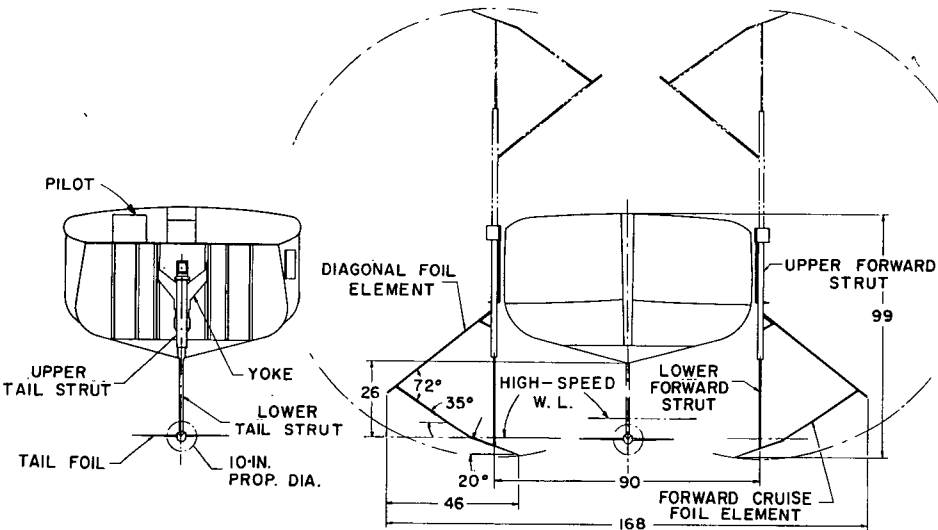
Front and rear views of the ONR supercavitating hydrofoil boat
